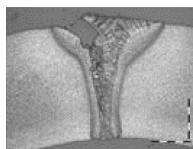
Laser hybrid-welded bend test specimen after the test.
